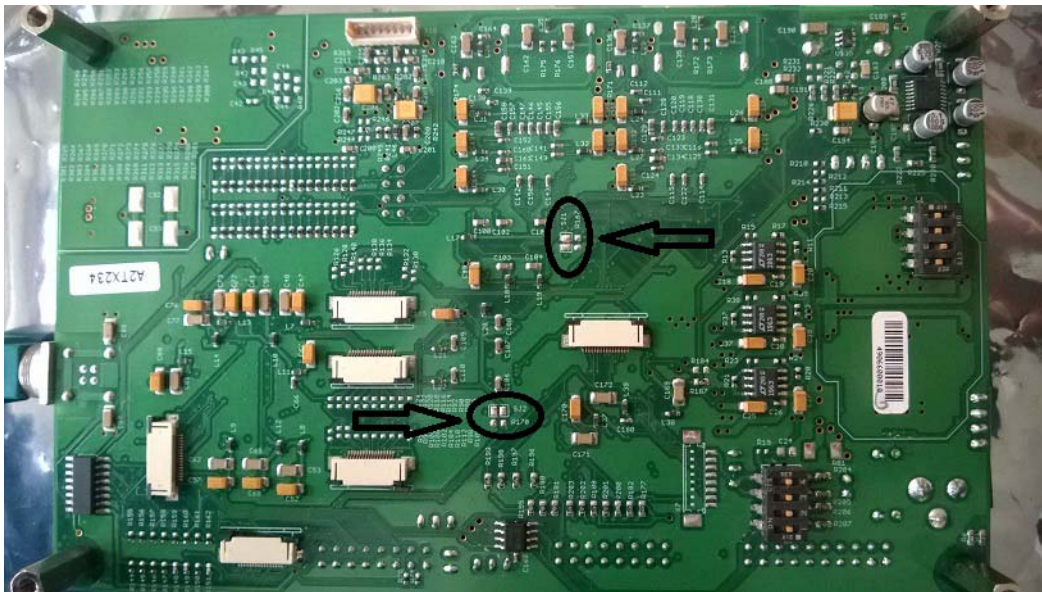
Locations of SJ1 and SJ2 jumper connections on the ADK board (bottom view)
